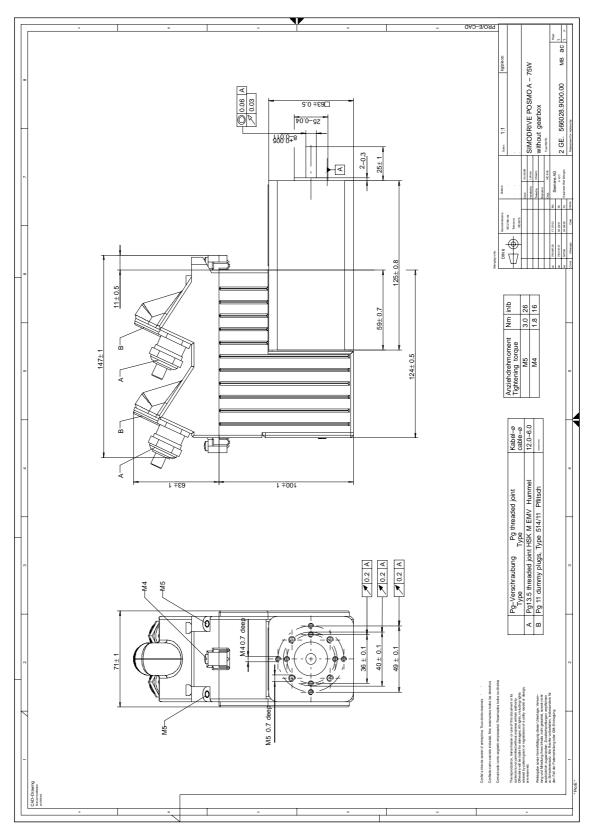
Dimension drawing: SIMODRIVE POSMO A – 75 W without gearbox
